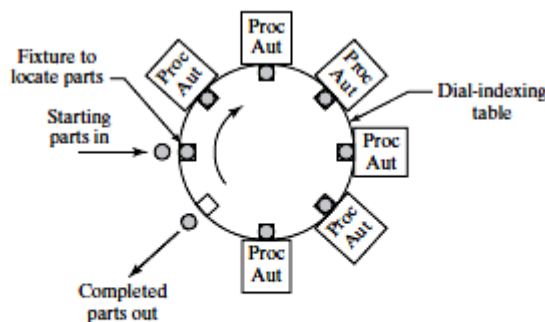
Rotary indexing machine (dial-indexing machine).
